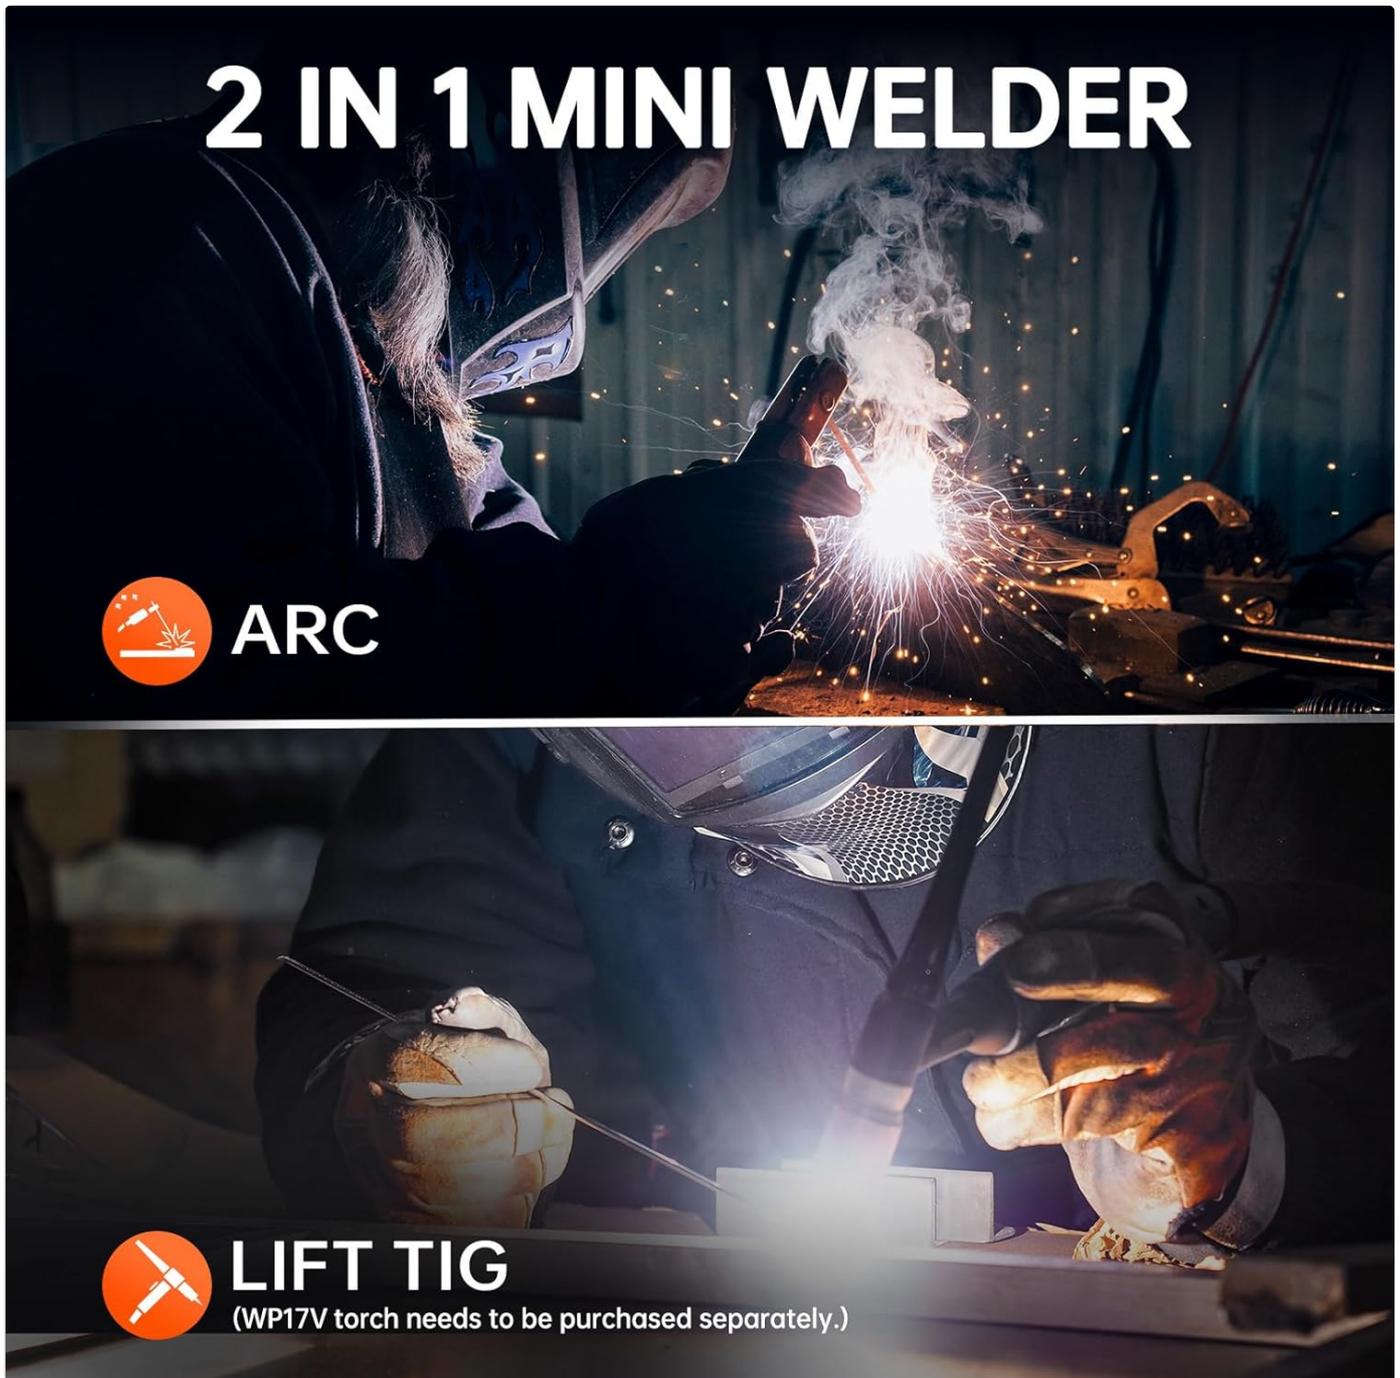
Illustration of the two primary welding processes supported: ARC (MMA) welding and Lift TIG welding. The image shows a welder performing each technique.
